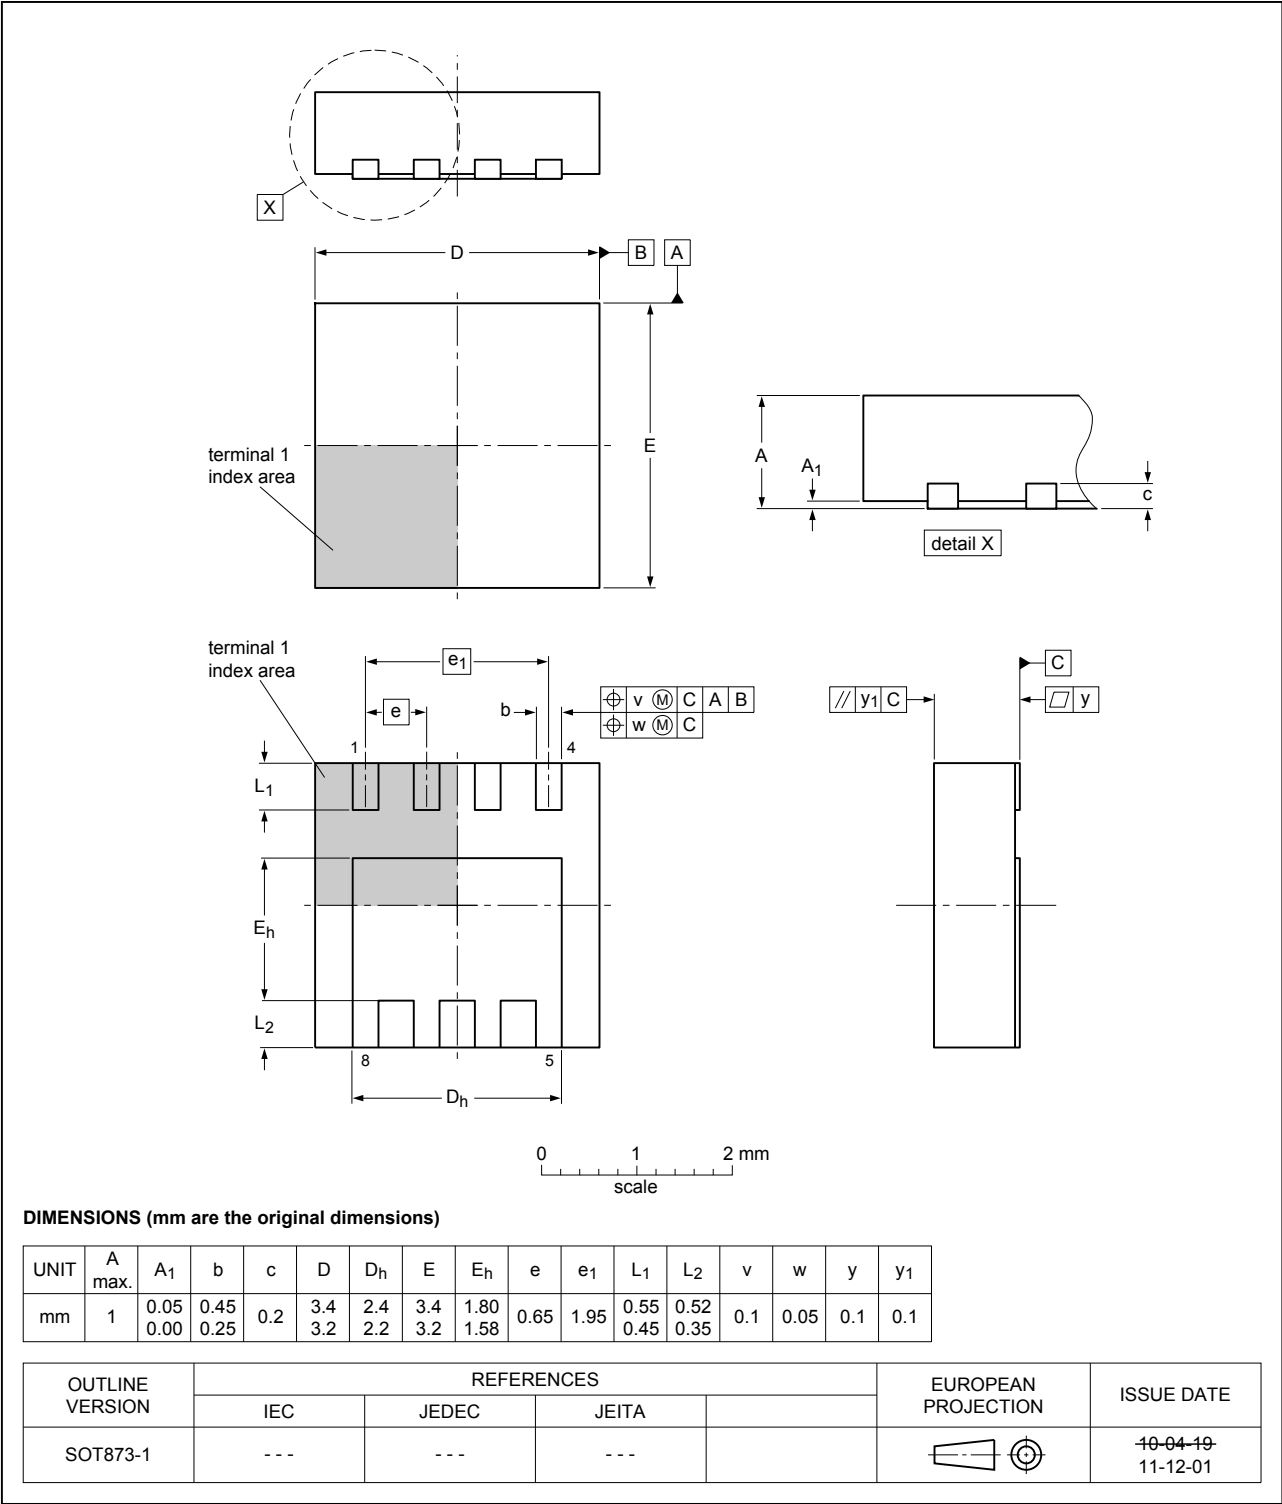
Package outline DFN3333-8 (SOT873-1)
